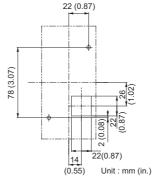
Panel Cut-out Dimensions (External/Face-mount Installation)
